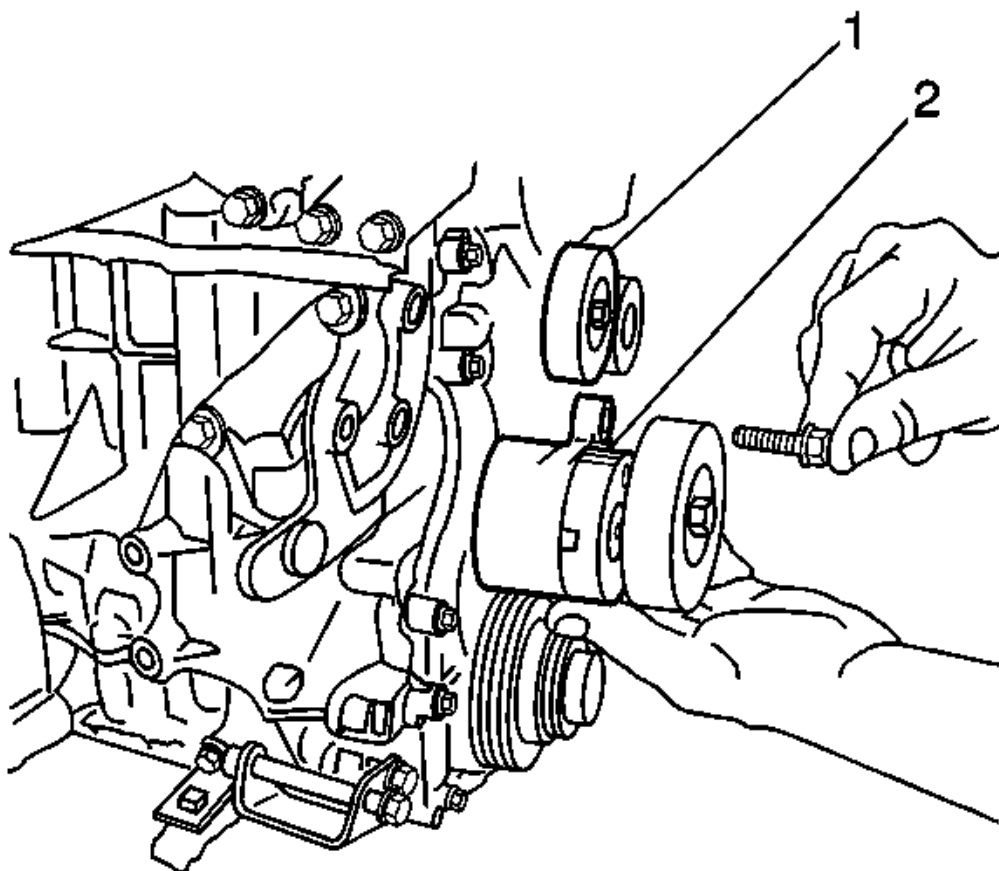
View Of Drive Belt Tensioner Bolts & Idler Pulley
